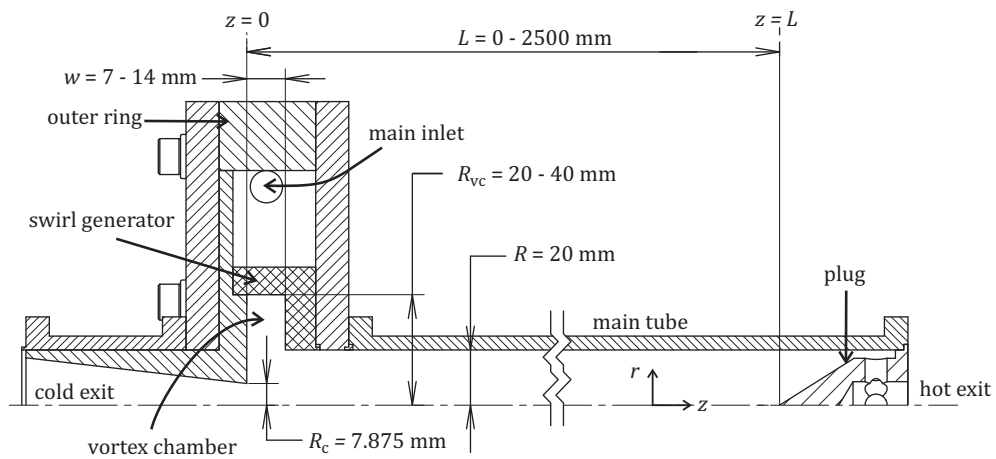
Section of the Ranque-Hilsch Vortex Tube and its main dimensions.
